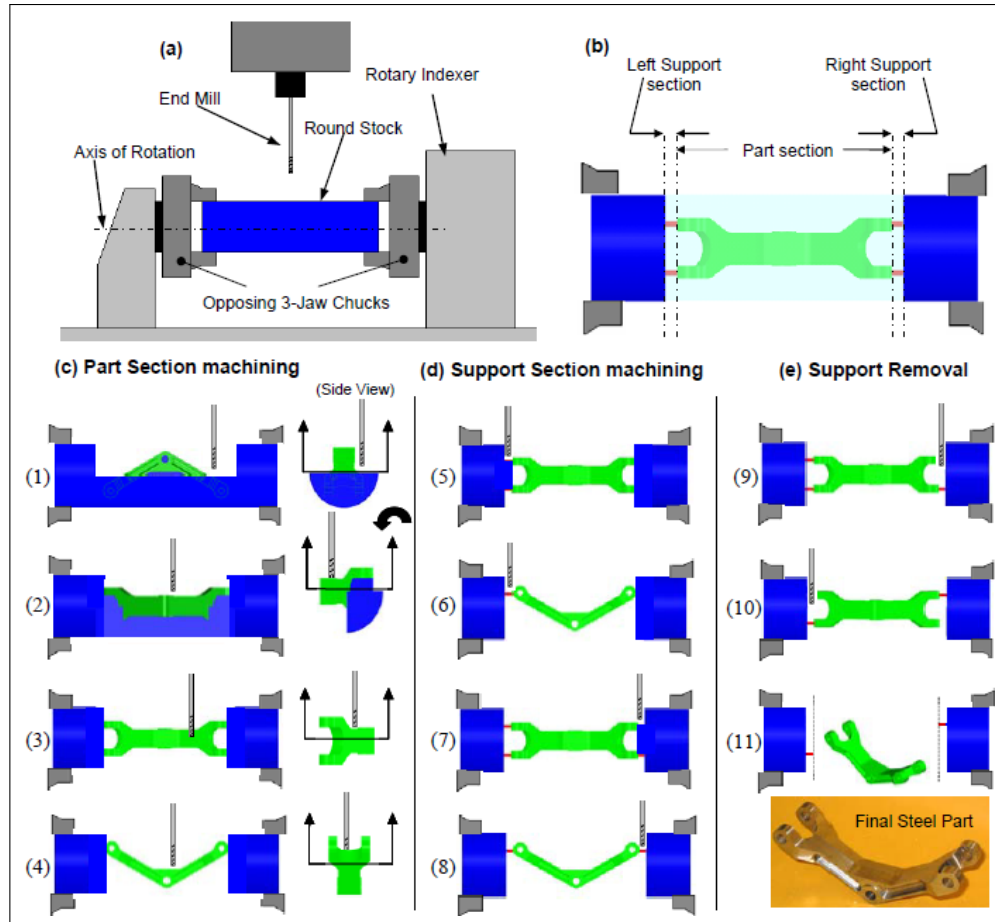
Rapid machining; (a) set up, (b) sections machining approach, (c) Part Section machining steps, (d) Support Section machining steps, and (e) Support removal steps[14]
